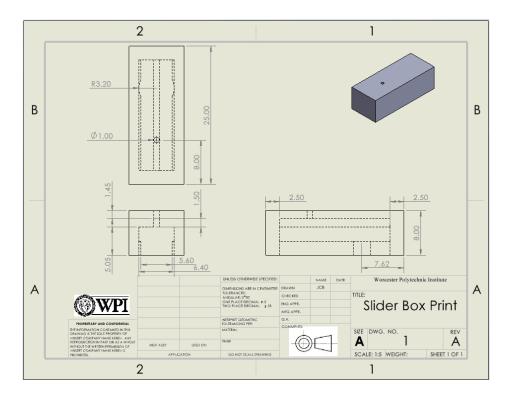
CAD drawing of the slider, showing the cross section of the inside, which lines up with the cap of the pill bottle.
